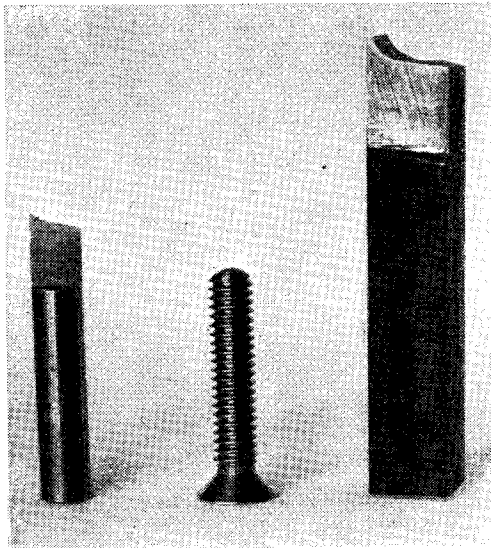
Left—tailstock cutter for rounding bolt-ends. Right—lathe form tool
